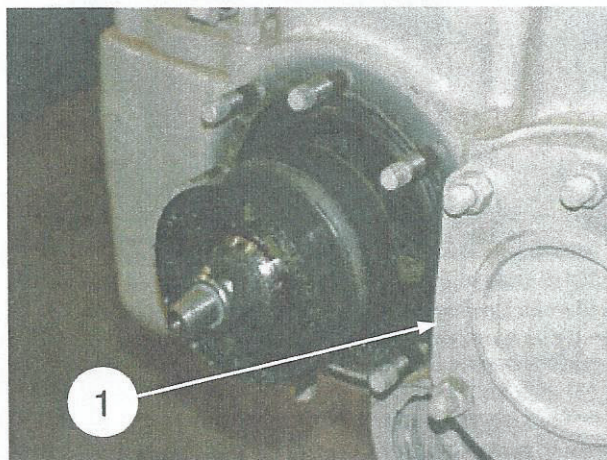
Pulling the piston and piston rod. Cylinder head [1].
